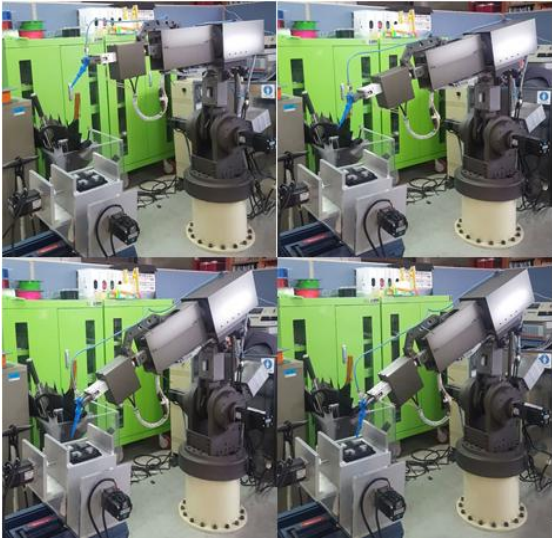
RS2 point1 welding process implementation when 2-axis additional axes do not work
